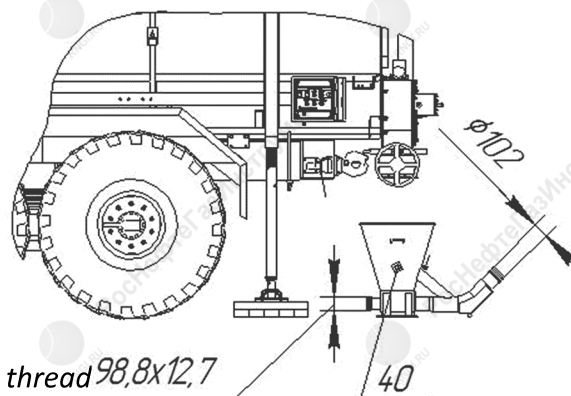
Mechanical mixing plant USM-14R1 with the floor hydraulic pressure mixer.
